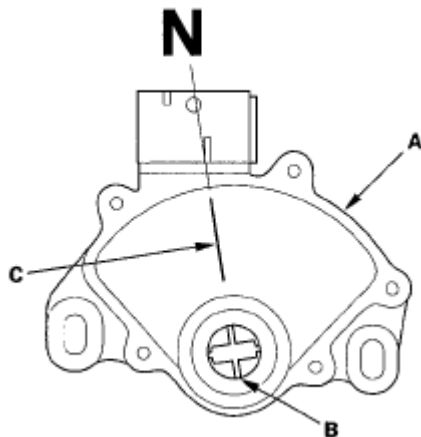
Identifying Transmission Range Switch And Control Shaft Hole
